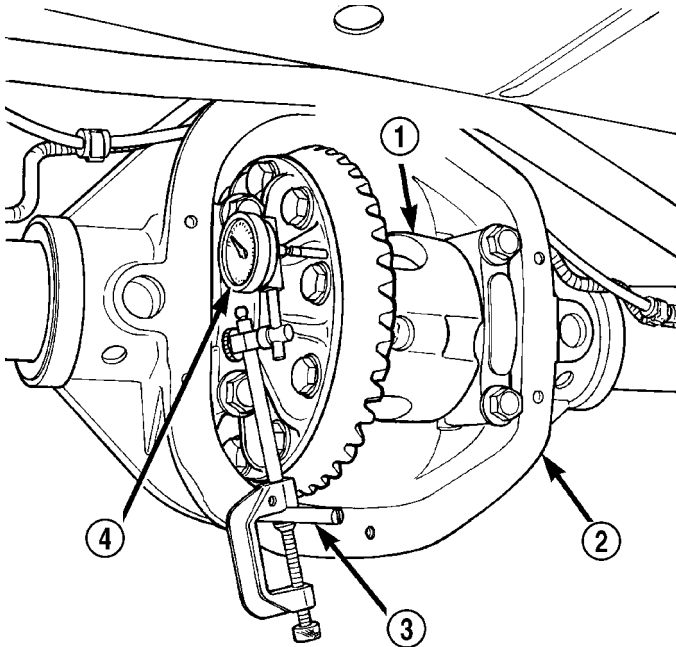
SEAT DUMMY BEARING RING GEAR SIDE
